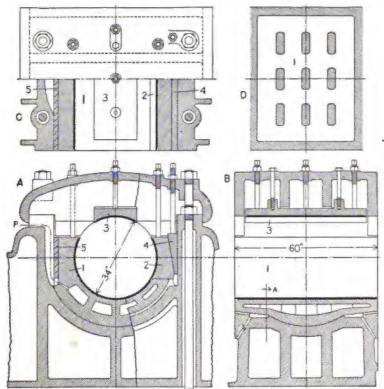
Bearing for Engine in Fig. 219 and Shaft in Fig. 312 II. Scale 1 to 40.
